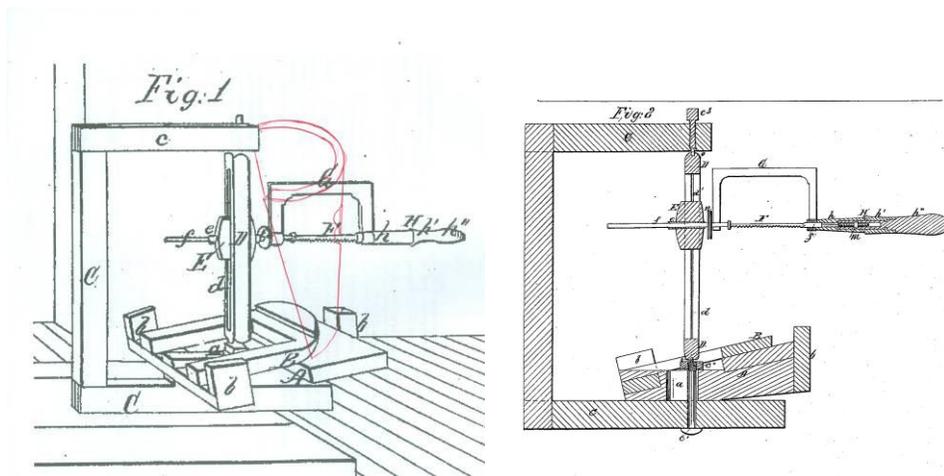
Belter Patent, , Machinery for Sawing Arabesque Chairs
